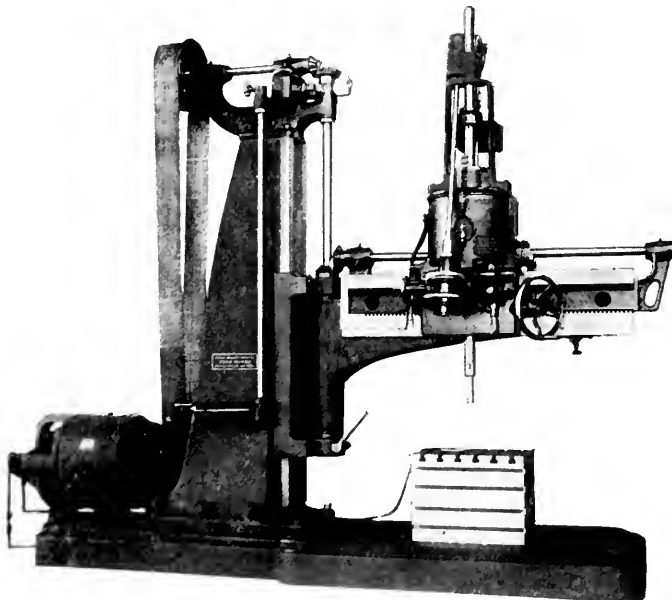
Individual Drive, Radial Drill. Note amount of gearing and belting necessary to drive drill
